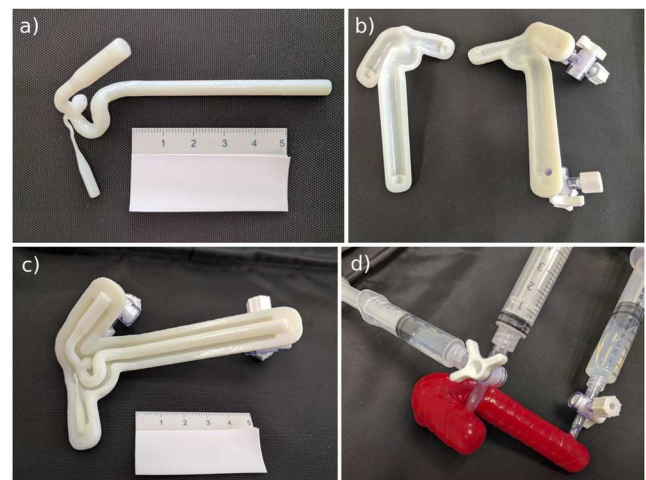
Silicone model construction. (a) 3D printed positive mold after polishing. (b) Housing parts. One of the parts was drilled and glued to three-way taps used to inject the silicone compound. (c) Positive mold inside the housing. (d) Positive mold and housing sealed with an elastic rubber band and ready for silicone injection.
